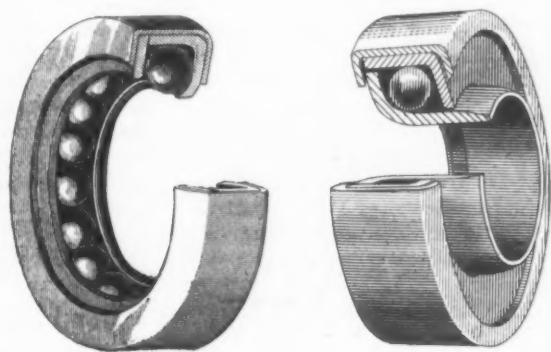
Broken View of Bearing. Fig. 2.—Combination Bearing.
